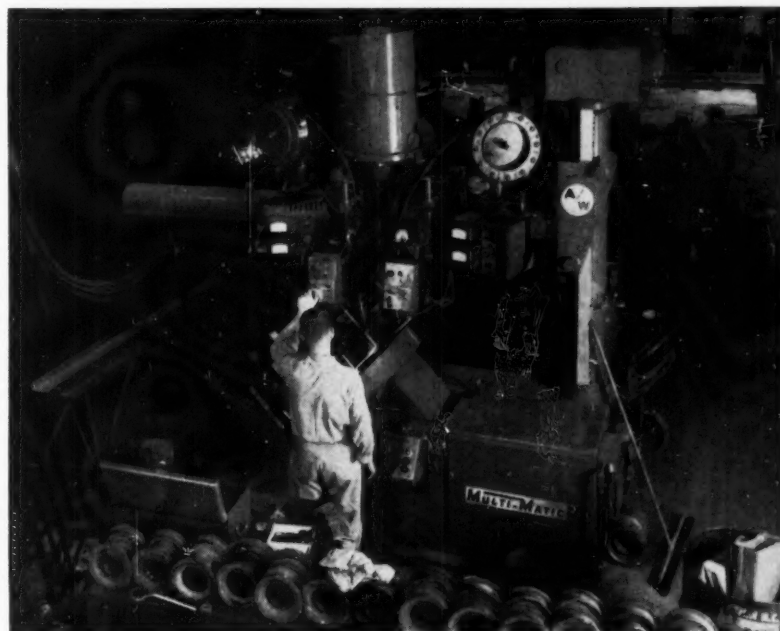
The Multimatic fixture with Lincolnweld automatic head used by Beckwith Machinery Company handles six rollers at one time. This arrangement keeps rollers from overheating and reduces bore shrinkage. Hardsurfacing flux is stored in large containers behind or above the welder. The electrode is measured as it is used, so that it is possible to accurately determine the cost of welding materials used on each set of rollers.
